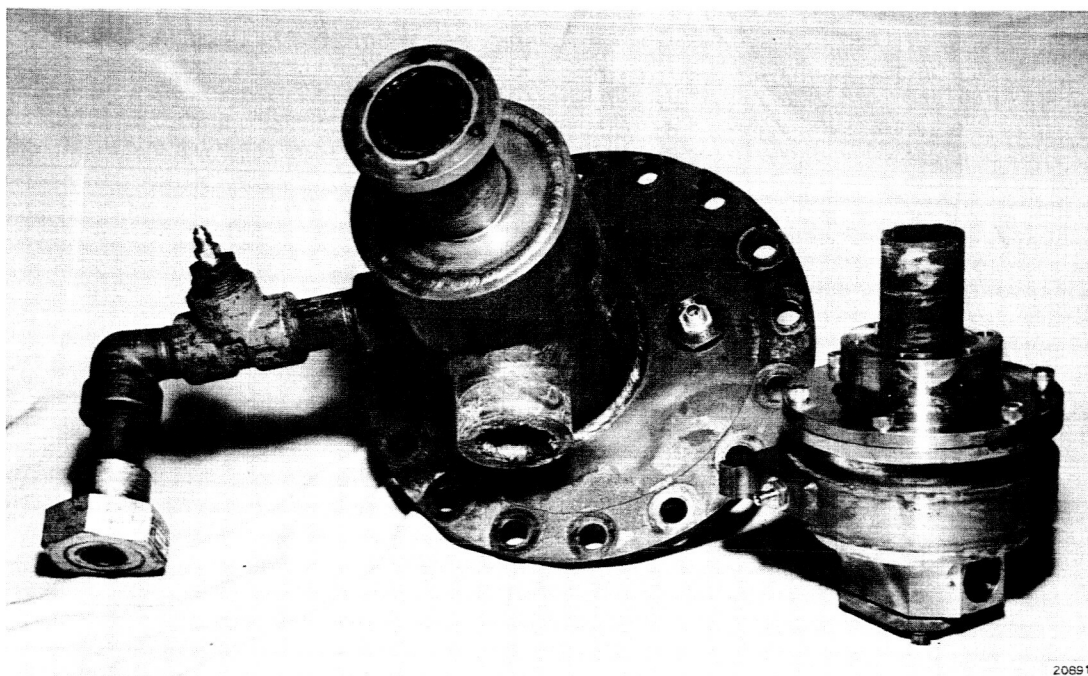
Vortex Valve Assembly, Plenum Chamber and Vent Orifice Assembly
